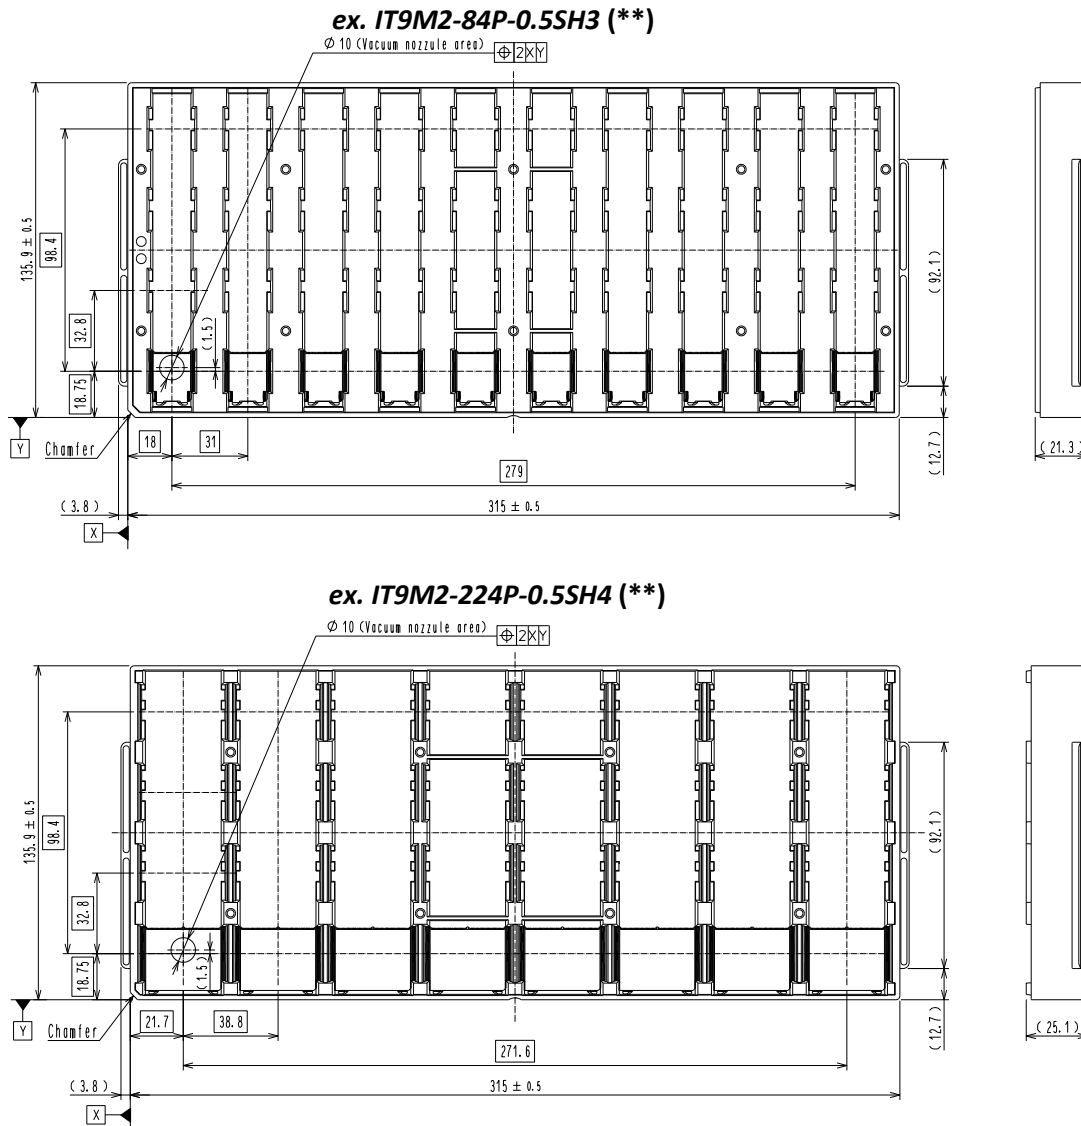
Hard Tray for IT9 Plug (dimensions in mm)
